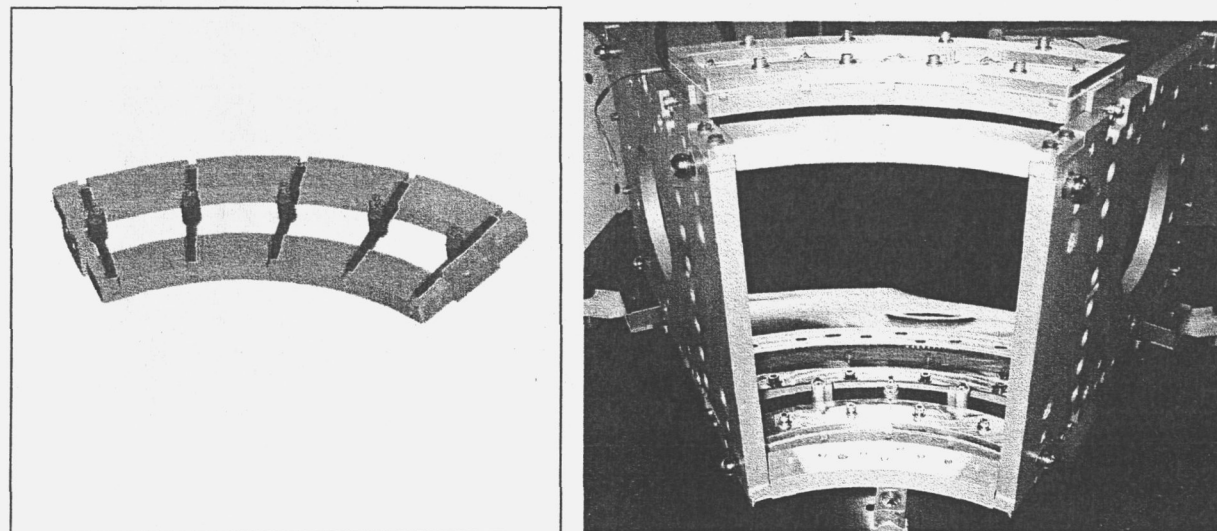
(Left) schematic of front or read end of holding fixture, with five piezoelectric actuators installed. (Right) Photo of mirror segment installed in actuator test structure. The top and bottom plates hold the actuators, which are not visible in this picture.
